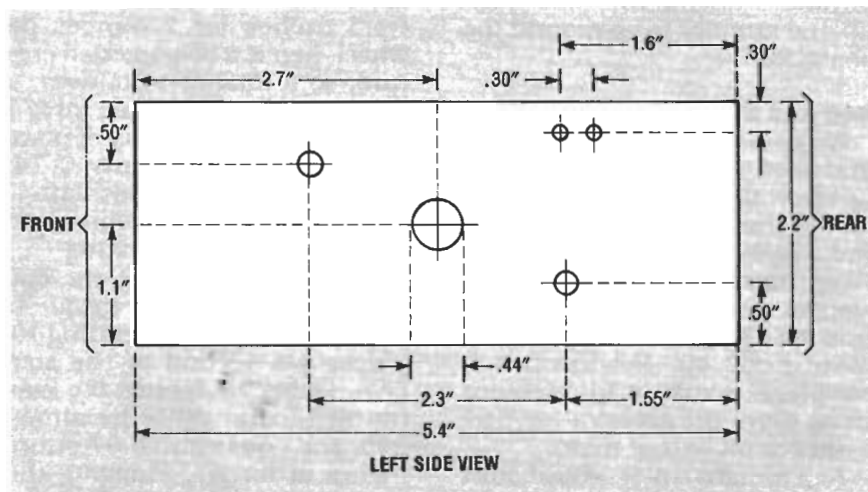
LEFT SIDE VIEW. The right side is a mirror image.
